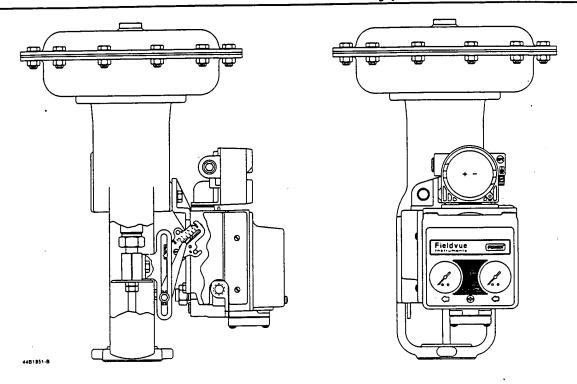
Type DVC5000 Yoke-Mounted on Type 657/667 Size 30-60 Actuator
